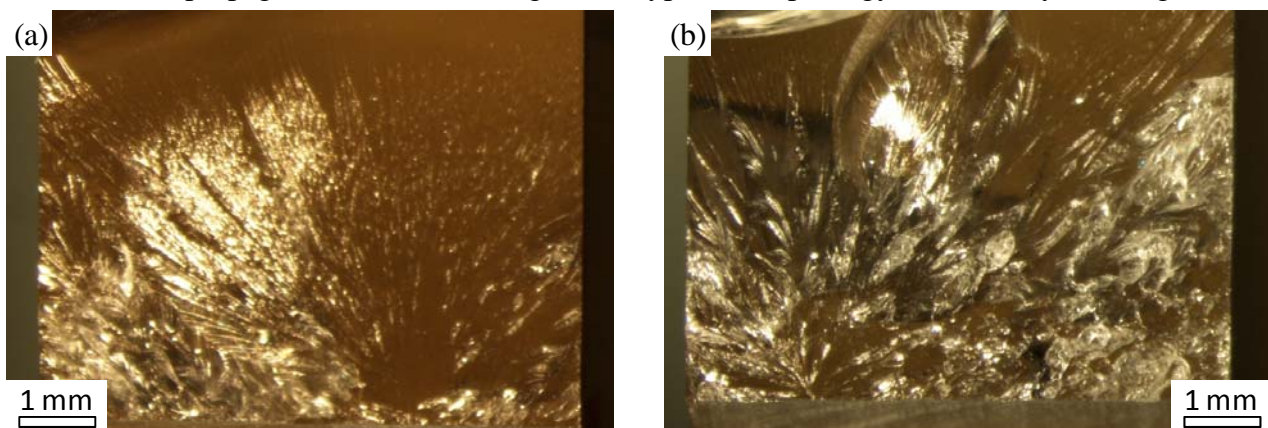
Fracture surfaces of the specimens with blunt notches inserted via (a) drilling (initial crack tip radius of 300 μm) and (b) milling (initial crack tip radius of 1.5 mm)
